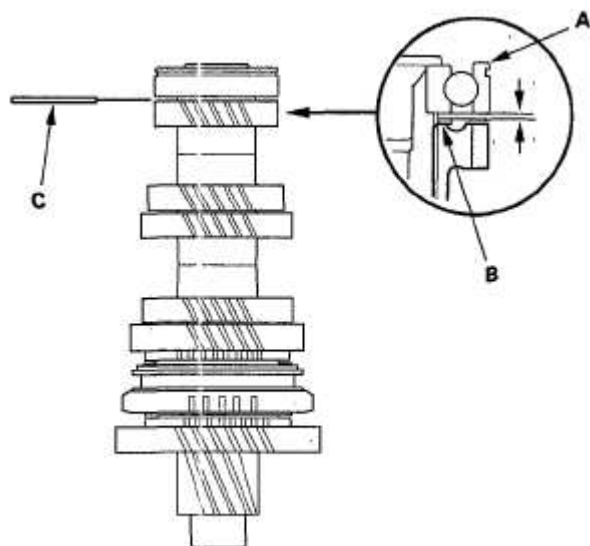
Identifying Bearing, Shim And Feeler Gauge
